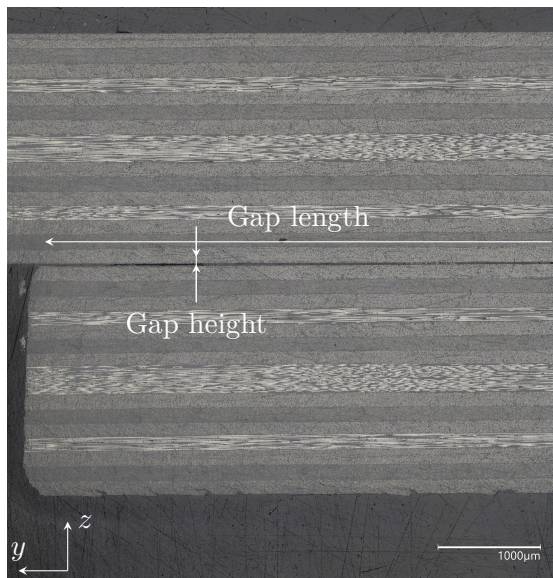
Overview, enlarged 100x, of sample L of the assembly welded at recommended conditions (B1L1).
